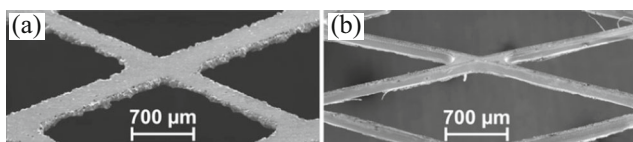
Upper side of a machined stent-like structure using a non-abrasive water jet and b micro-milling [54]
